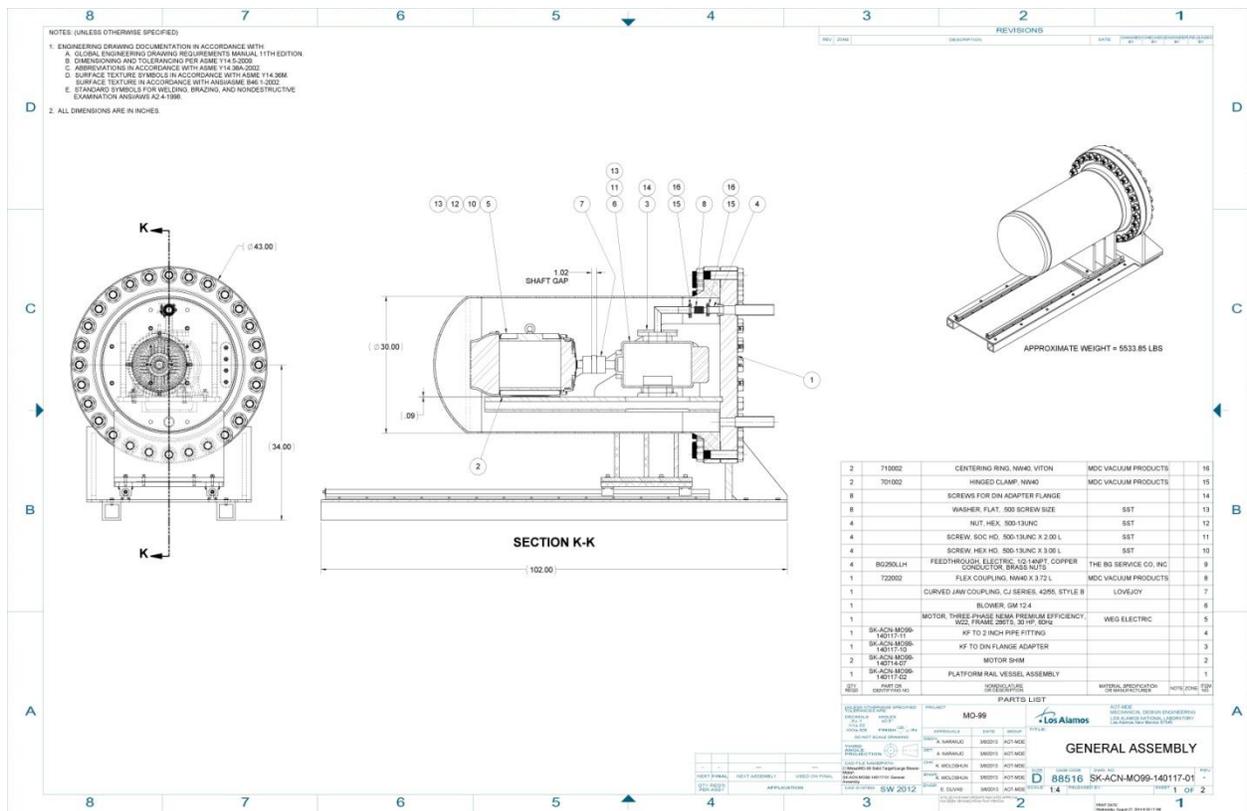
Drawing of the blower and motor in the pressure vessel, indicating overall dimensions.
